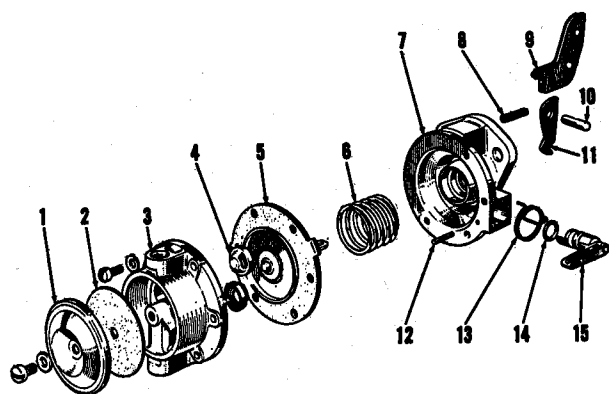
Exploded view of diaphragm type fuel lift pump.
